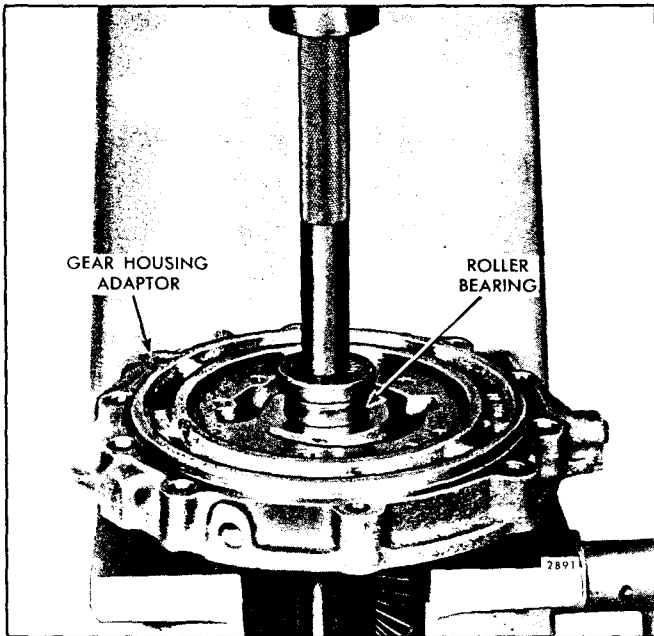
Installing Roller (Needle) Bearing in Gear Housing Adaptor
